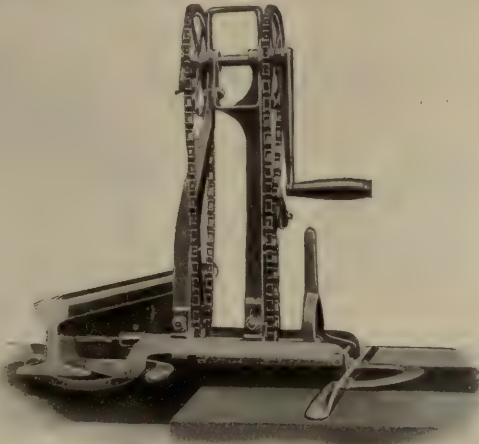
Buda Wilson Drill. Under Clutch. The Buda Company.
